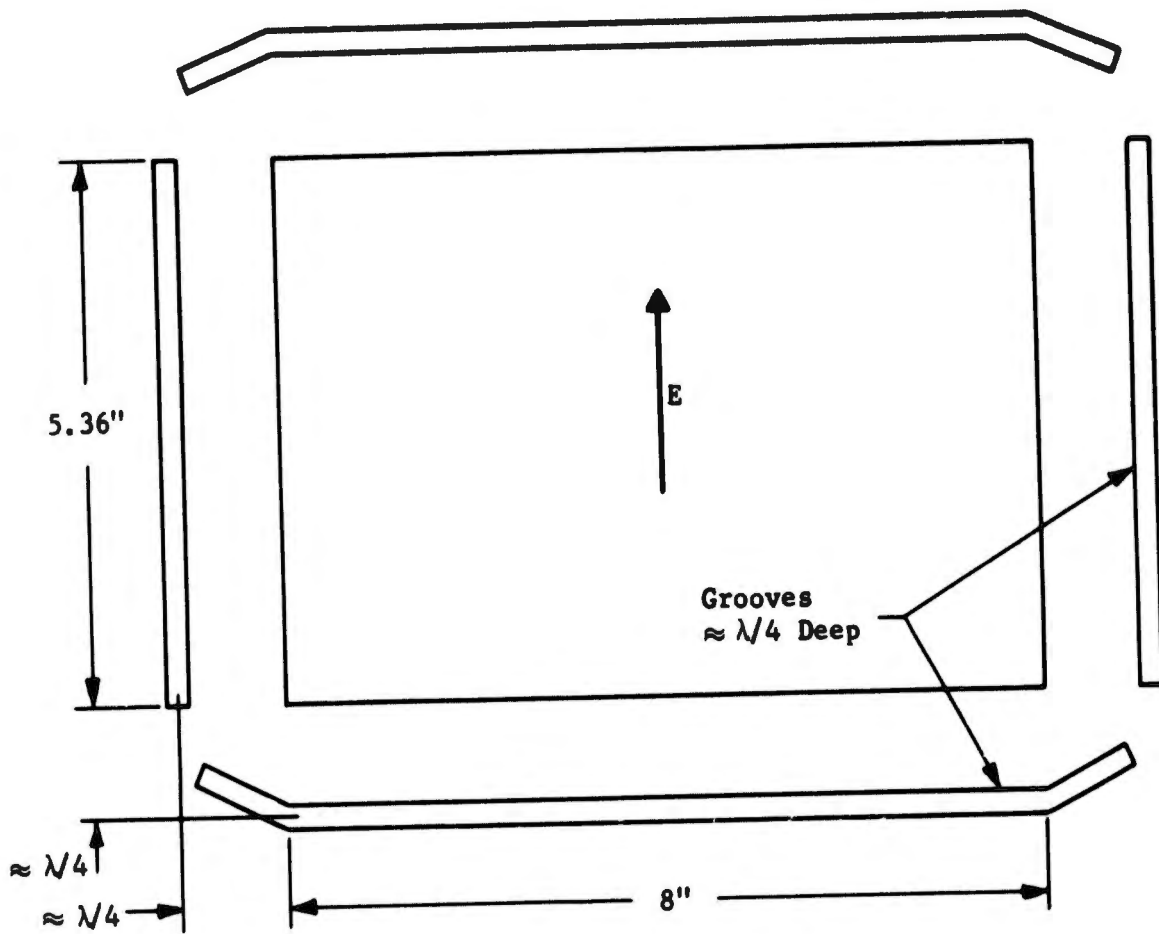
Proposed Choke Configuration Employing Top-Wall and Side-Wall Grooves.
